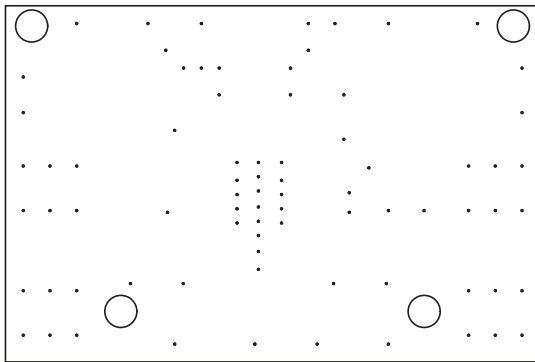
SKY65045 Evaluation Board Assembly Drawing
